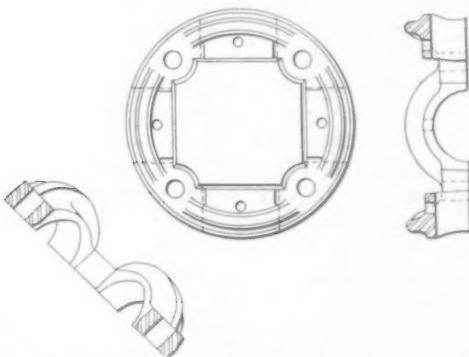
Details of the Work Handled by the Four-Way Drilling Machine
